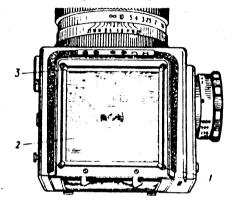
Camera KIEV 88 (first view): I - screw 8.900 034; 2 - viewfinder 5.811.079; 3 - strap 8.005.923
